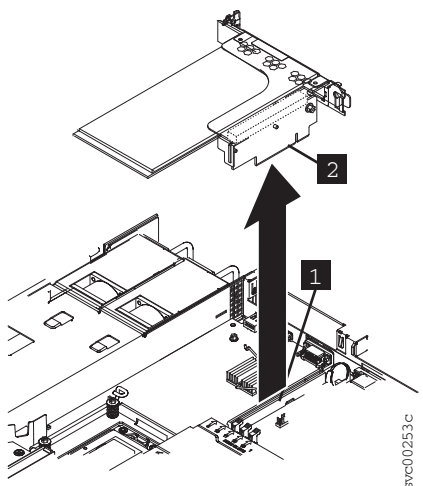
Removing the 10 Gbps Ethernet riser-card assembly
